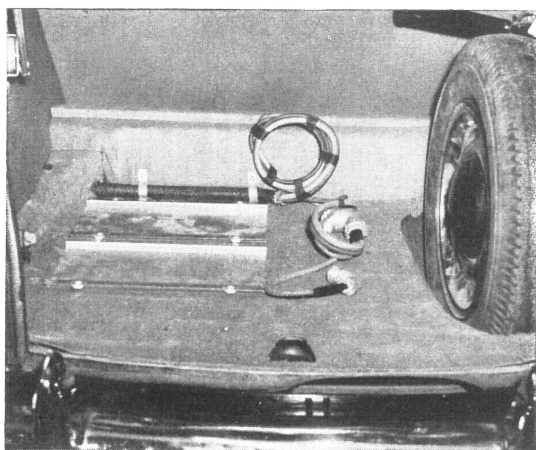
Cable clamps are placed, excess cable taped, and the cable and plugs arranged for connection to the equipment
